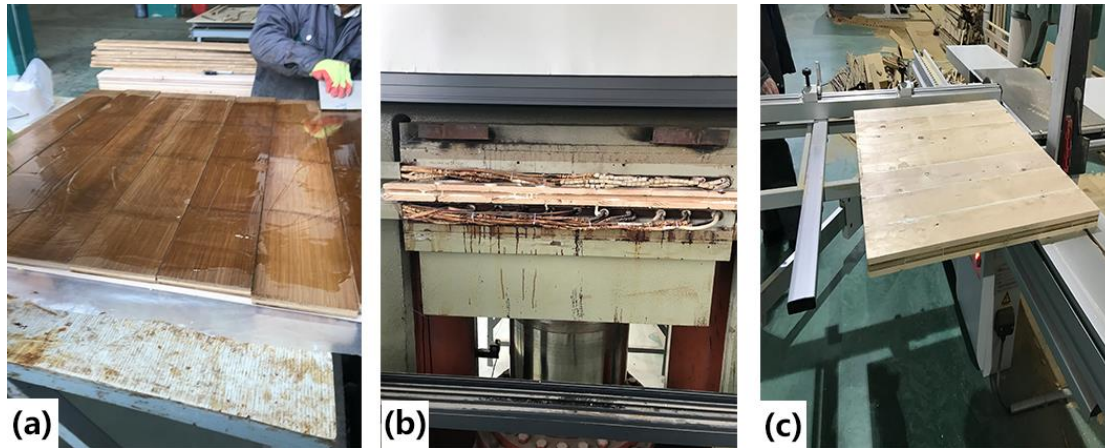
Process of making the BCLT board: (a) sizing, (b) pressure, and (c) cutting into the boards
